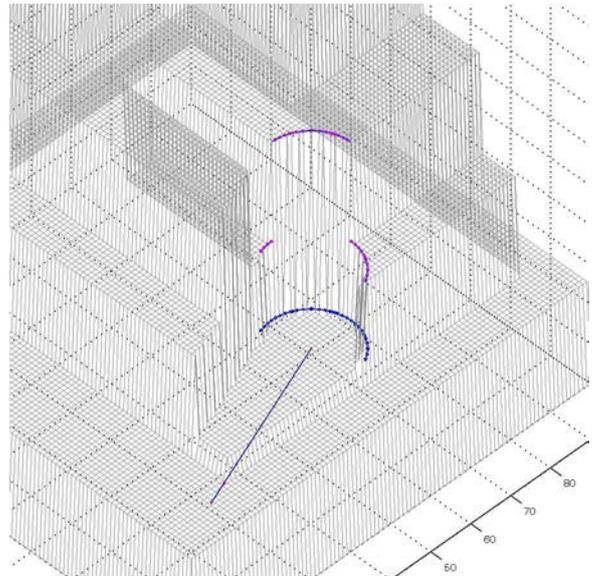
Enlarged view of bottom and top contact lines at the end of the first tool path segment
